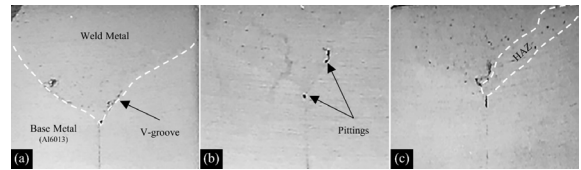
Macroscopic cross-section image of base metal, HAZ, and weld seams (a) 110A, (b) 140A, and (c) 170A
